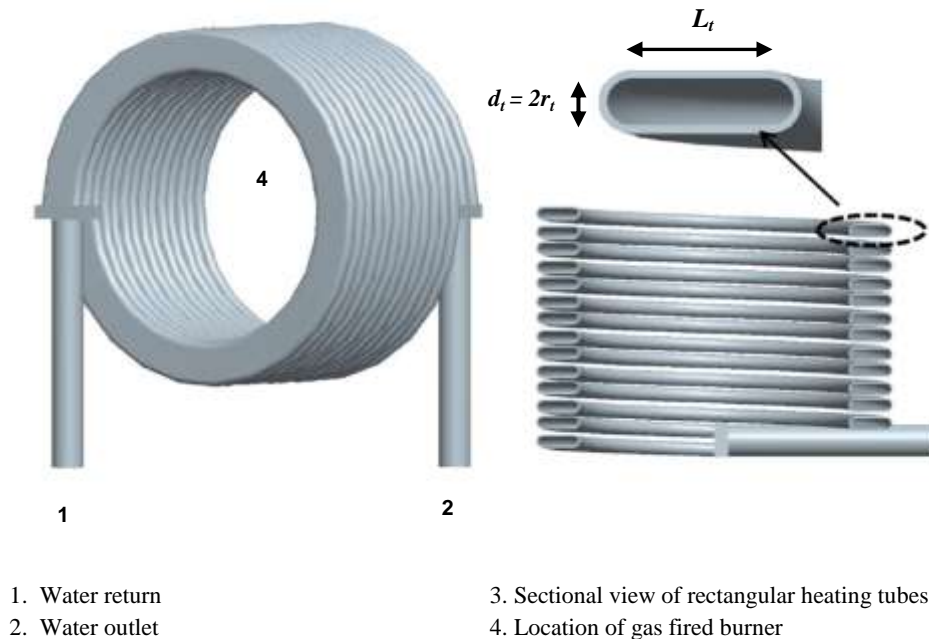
Primary heat exchanger assembly and rectangular tube sectional diagram.
